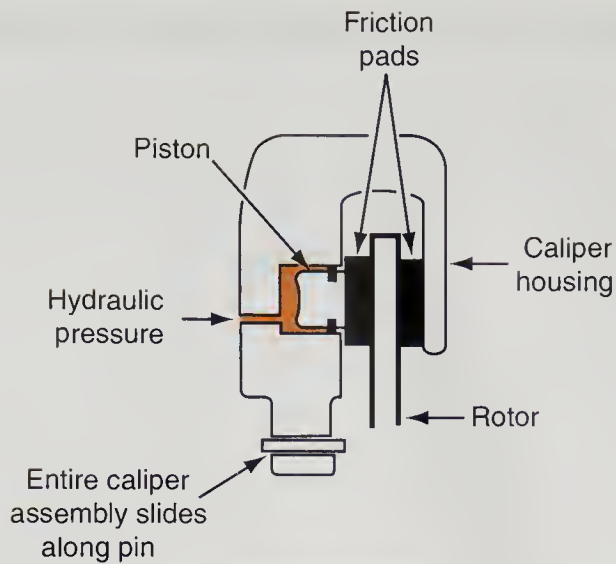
Hydraulic pressure in the caliper forces the disc brake pads against the spinning motor.
